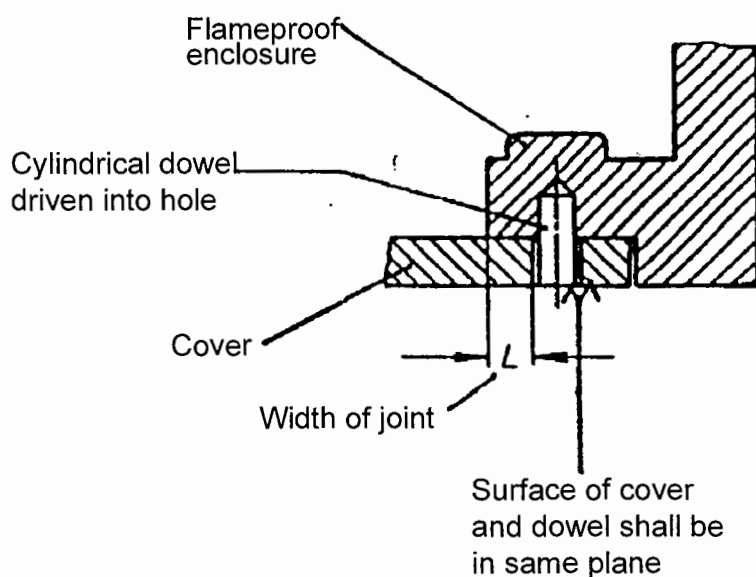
Example of construction for indirect checking of a flanged Group I flameproof joint
